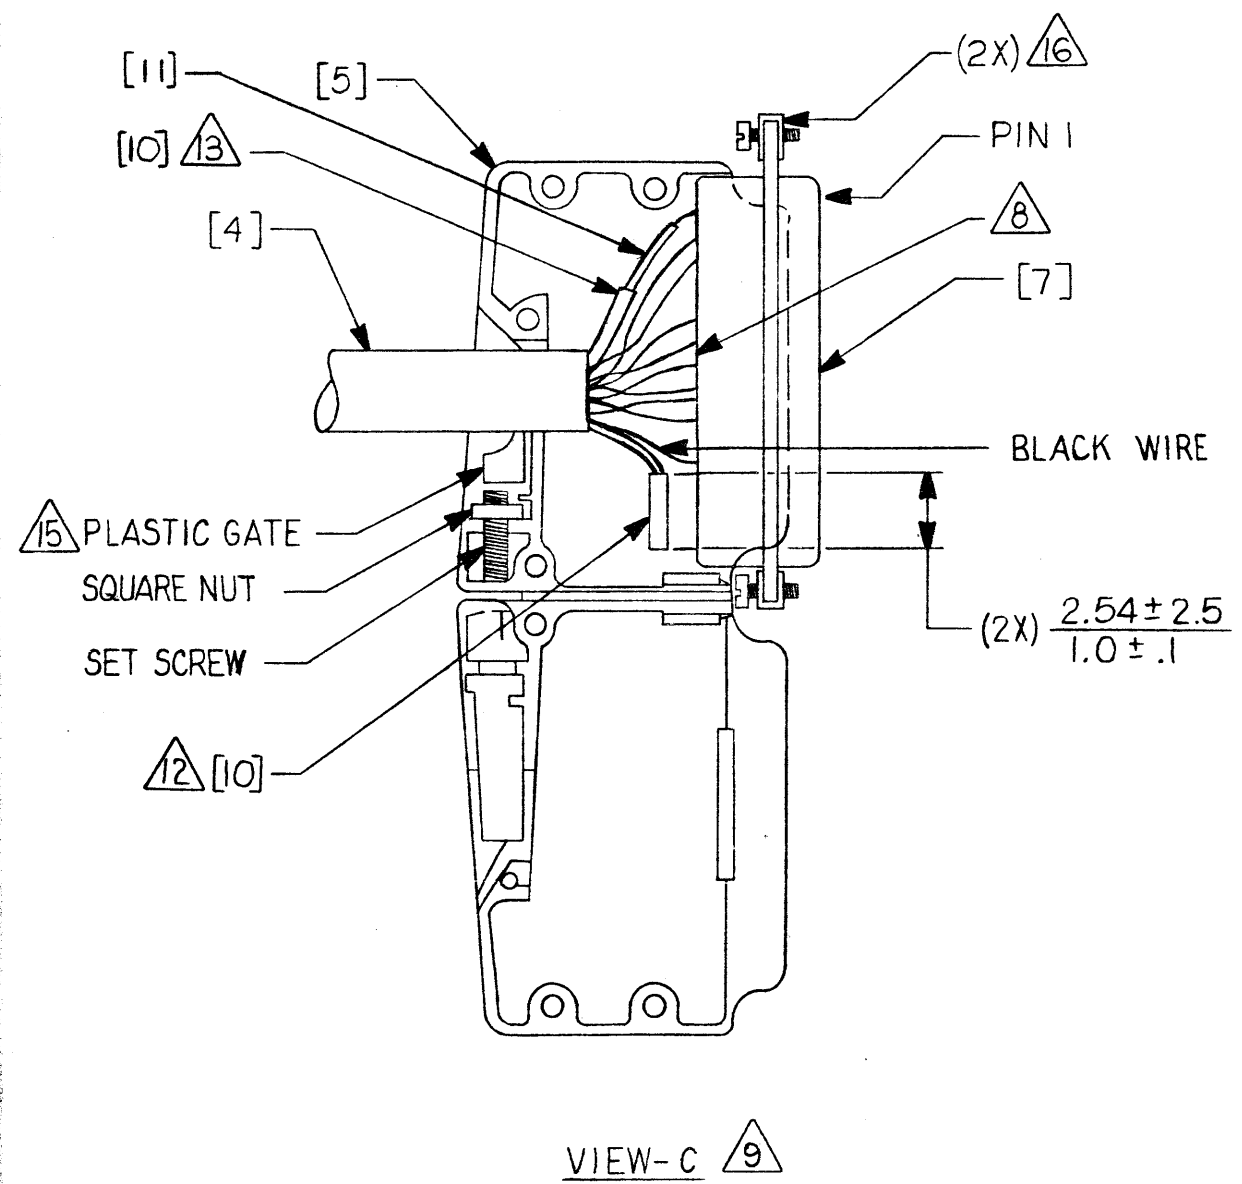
EXTERNAL CABLE ASSEMBLY - CONTINUED
